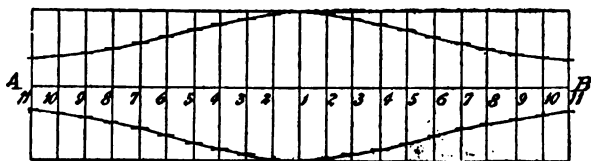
Multifold Bend. The Seam on the Shorter Side.
